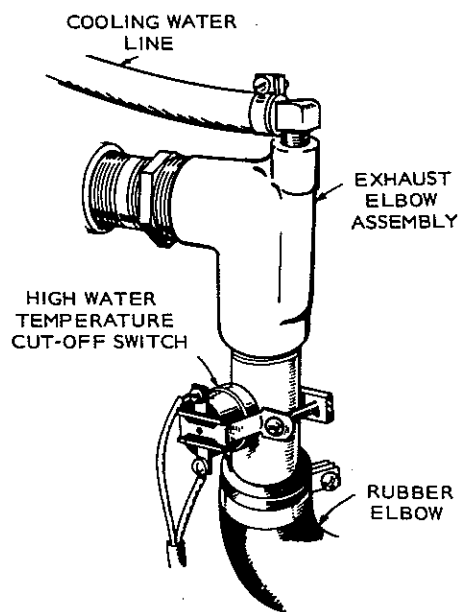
RAW WATER OUTLET CONNECTIONS
